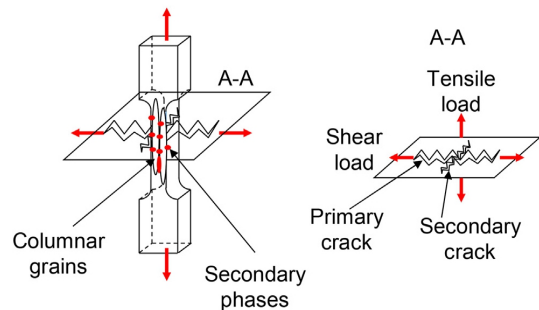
Illustration for an explanation of the fracture mechanism in a tensile specimen during tensile test. A–A cross-section corresponds to the fracture surface.
